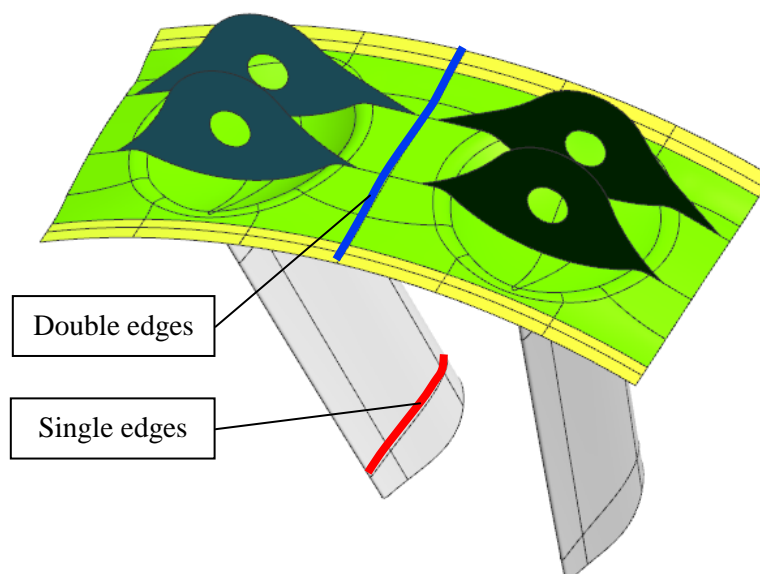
Edge weld type examples (*red*-single edge, *blue*-double edges)
